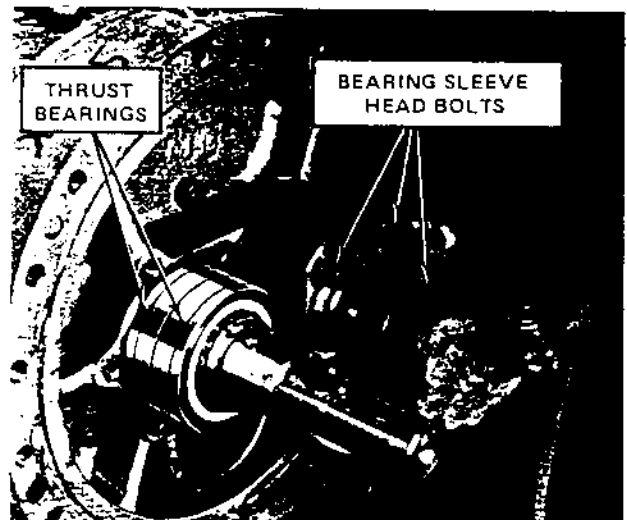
THRUST BEARING SLEEVE REMOVAL
